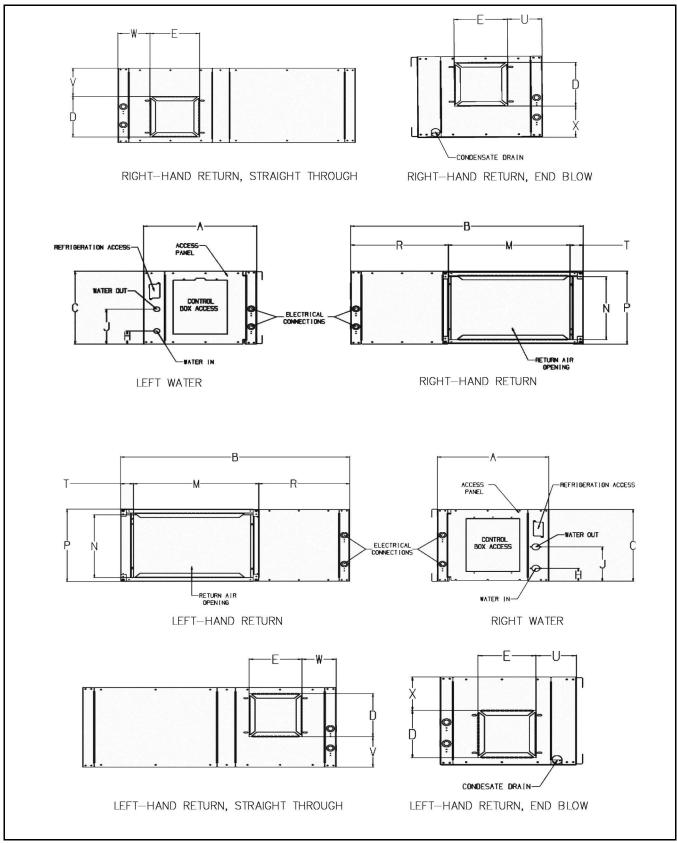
Horizontal (HZ) Units Dimensional Drawings
